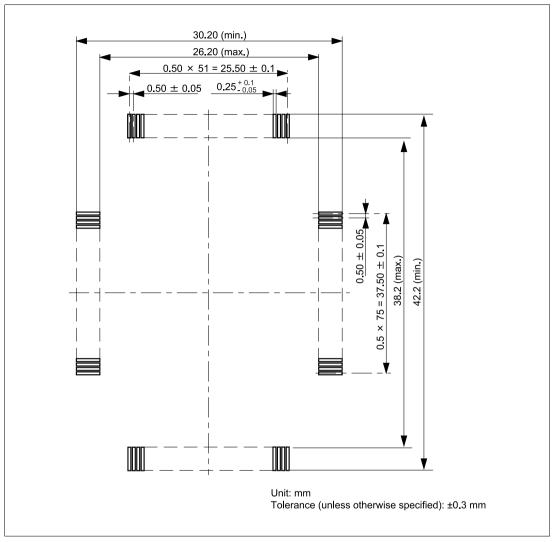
Recommended Mount Pad Dimensions of the User System IC Socket
